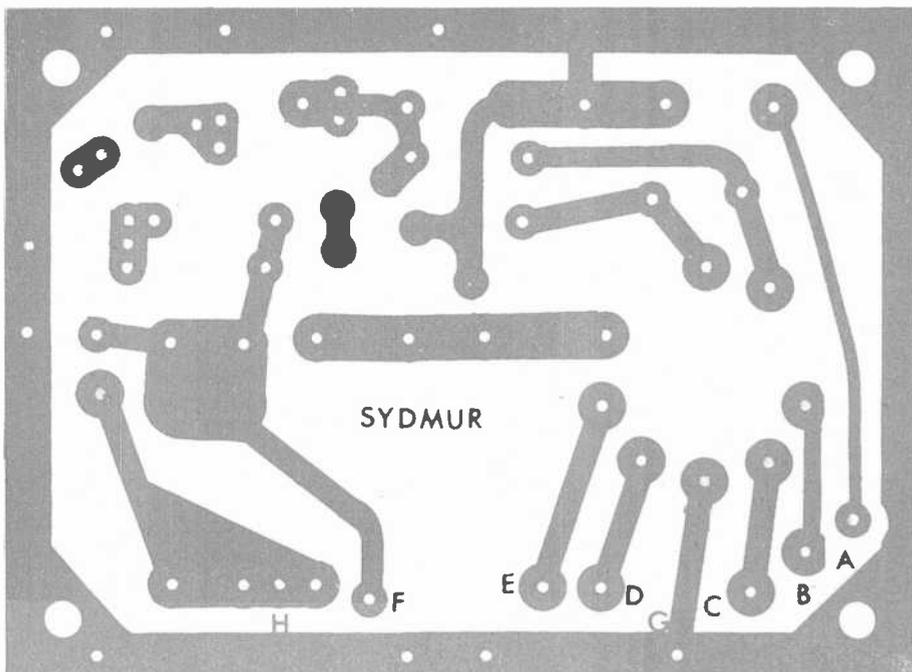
Component side of circuit board (left) shows parts location and orientation. SYDMUR kit has all components color-coded, and the appropriate colors marked on the board to speed assembly. Actual size photo of board (below) will help you make your own. Do not change alignment of conductor paths.
